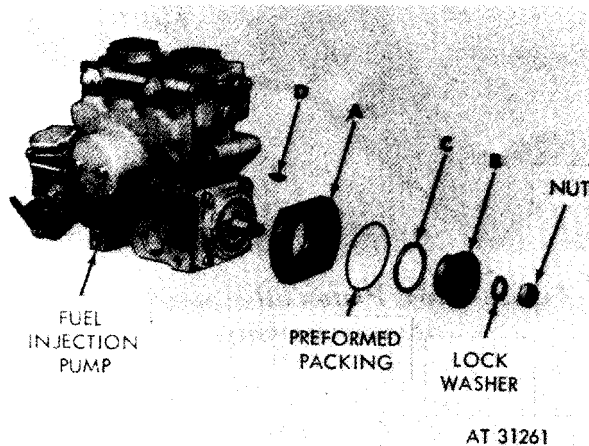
Disassembling or assembling fuel injection pump drive splined coupler.
